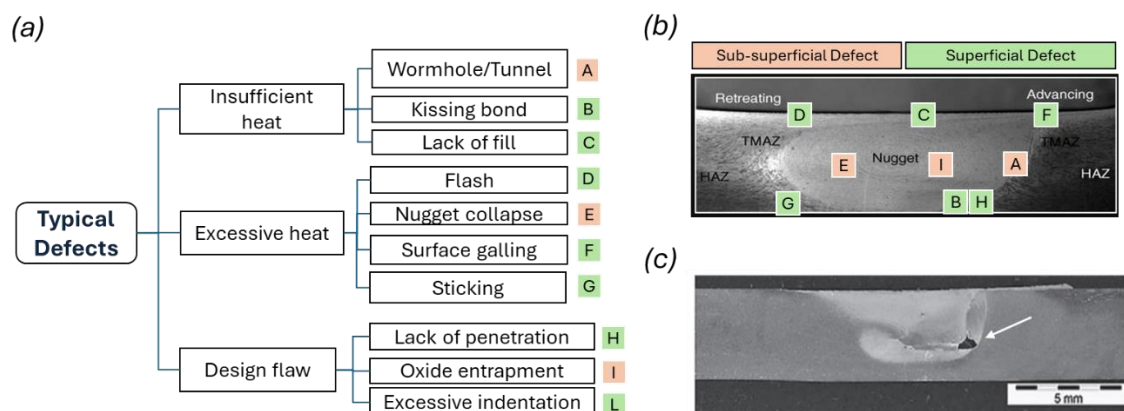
(a) Typical defect types encountered in FSW and (b) locations within the weld according to the classification of Mishra et. al [11]. (c) Cross-sectional view of a FSW weld illustrating a wormhole defect [218].
